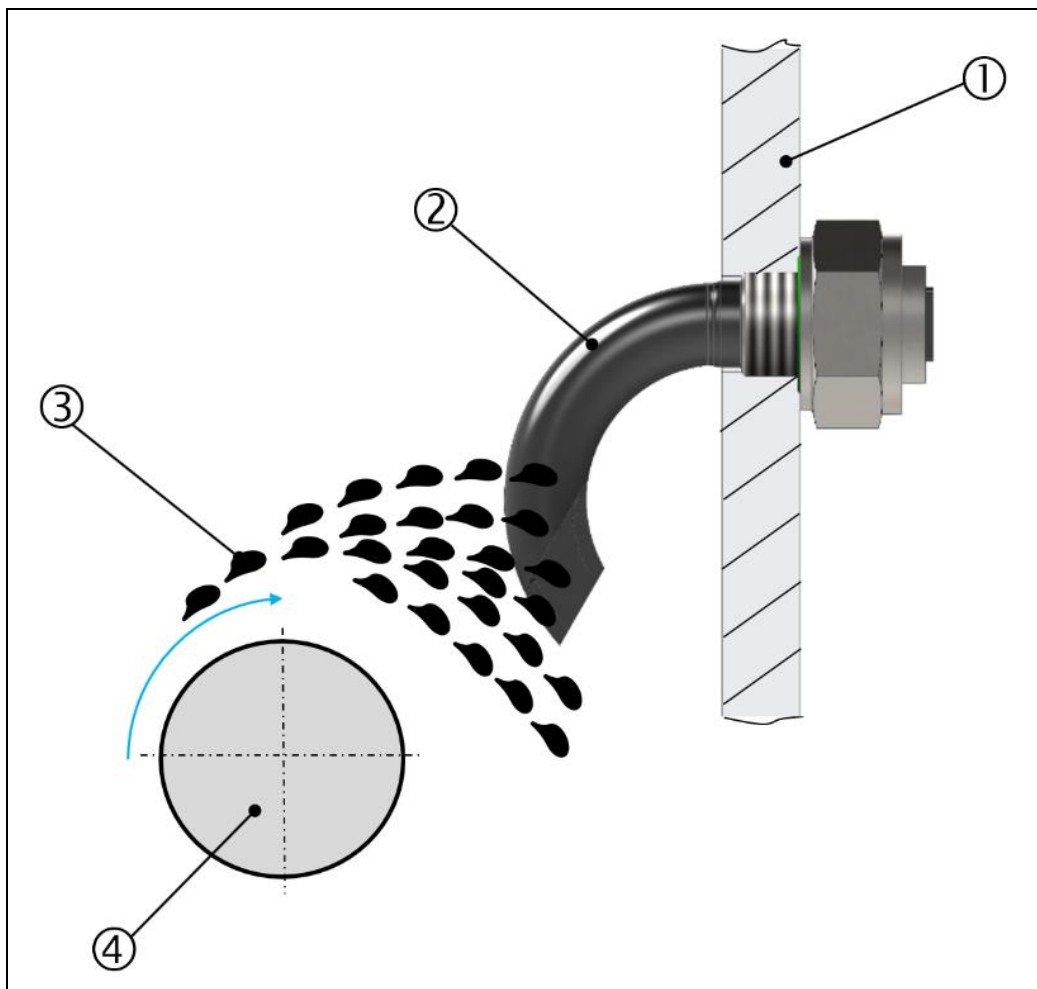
Recommended installation for the engine wall connection (view from the crankshaft end)
